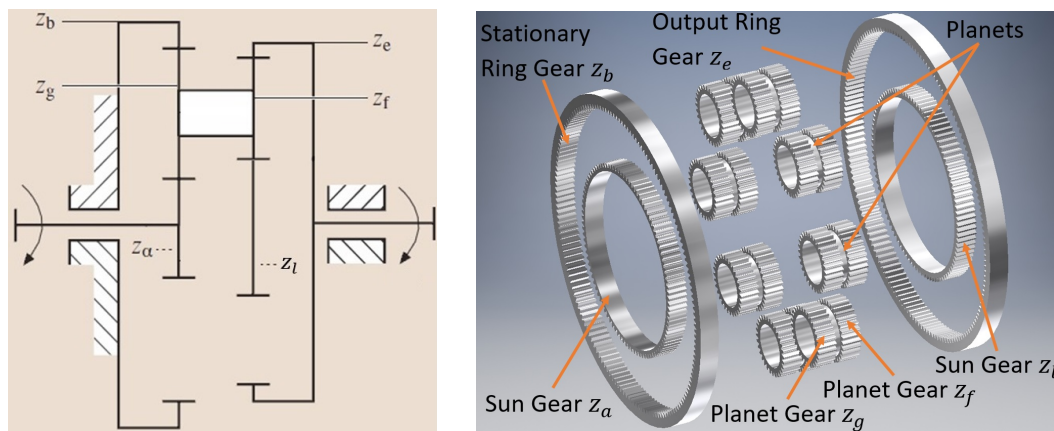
The Bearingless Planetary Gearbox kinematic layout (one left) and CAD rendering (on right).
